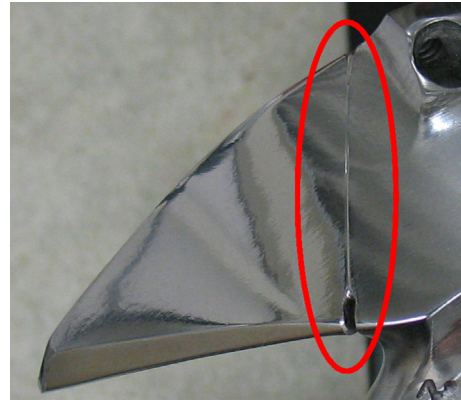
Wear damage caused by the thread on a used bobbin case.
